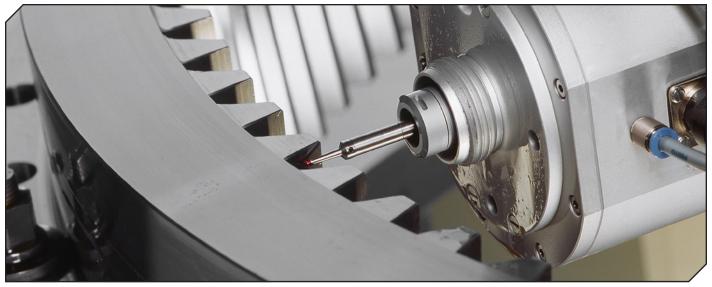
On-board inspection of both internal and external gears is fully integrated on Gleason machines.
